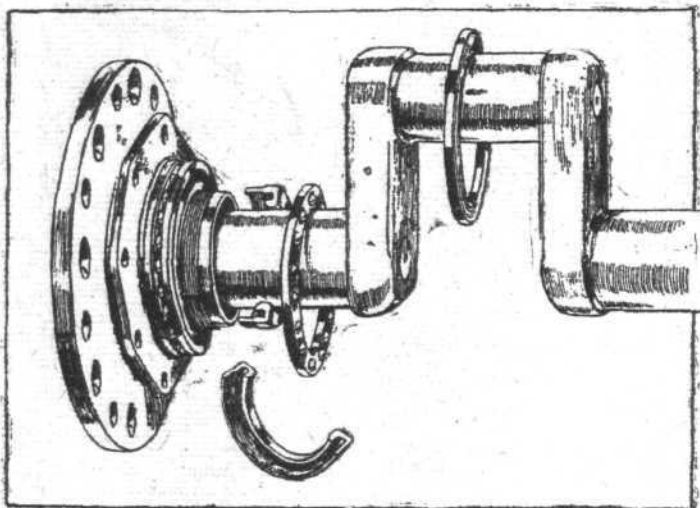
Sketch of propeller thrust race, showing split collar which secures the races in position.
